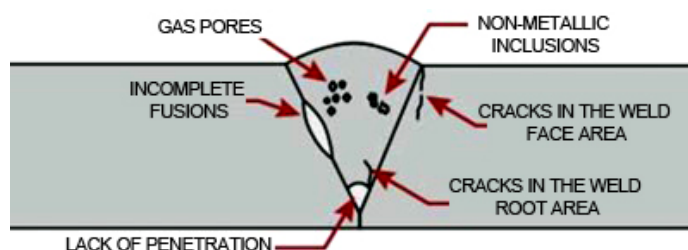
Typical imperfections in laser welded joints [1, 5, 14–21]
